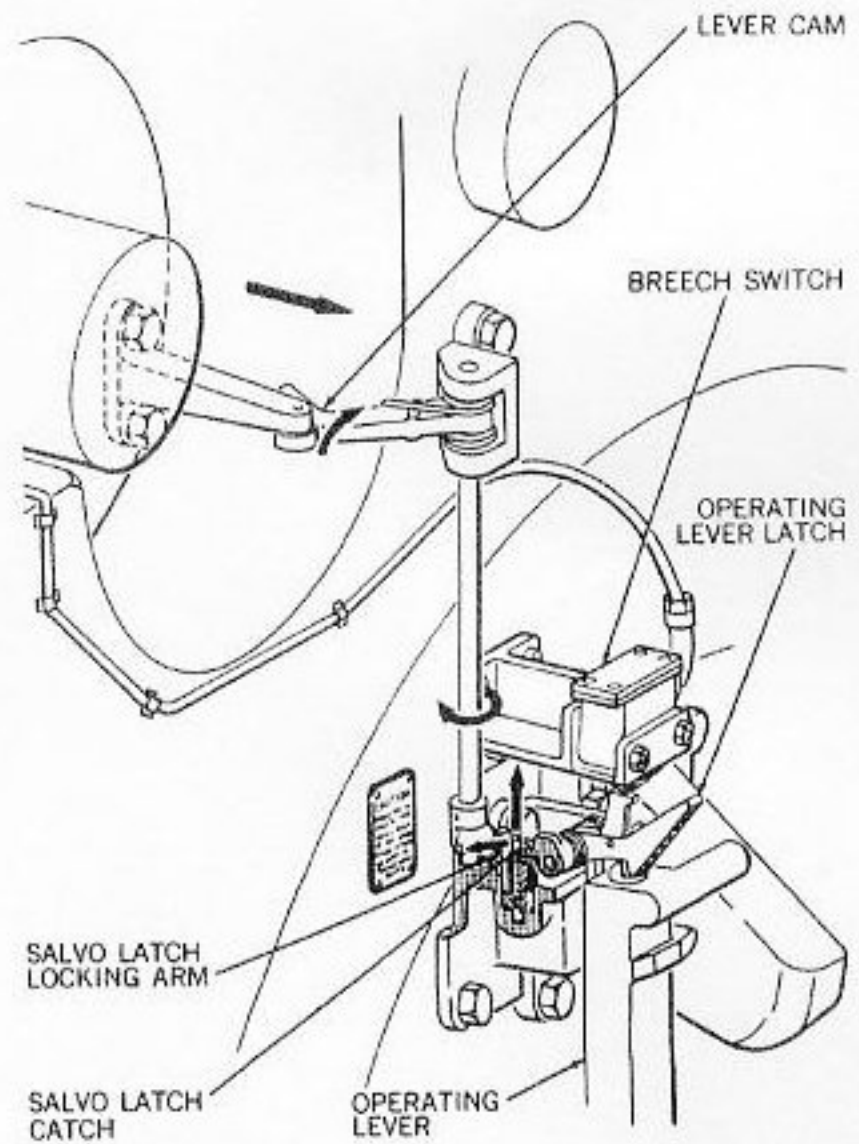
E. 16-inch Gun Assemblies, Salvo Latch Actuation, Gun Recoil.
